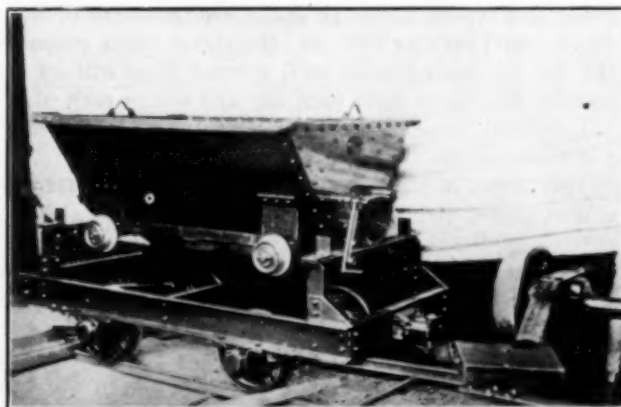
DUMP CAR WITH REMOVABLE BODY
